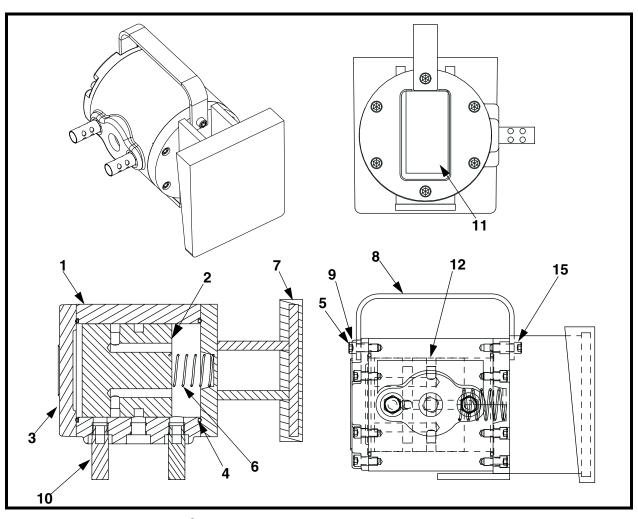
Martin® Non-Impacting Railcar Vibrator Assembly, P/N 36889
